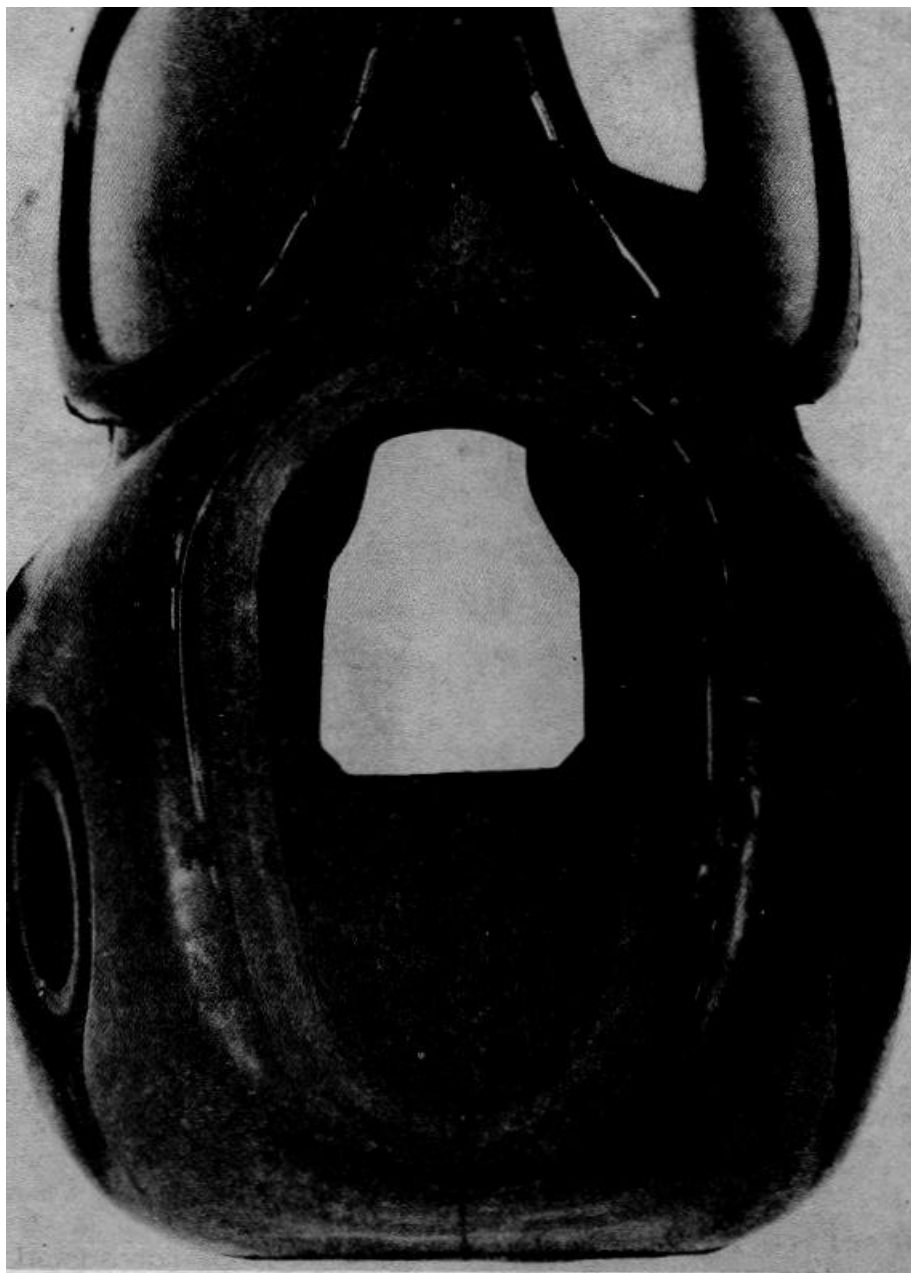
Crimping ring seated around the voicemitter-outlet valve assembly opening.
